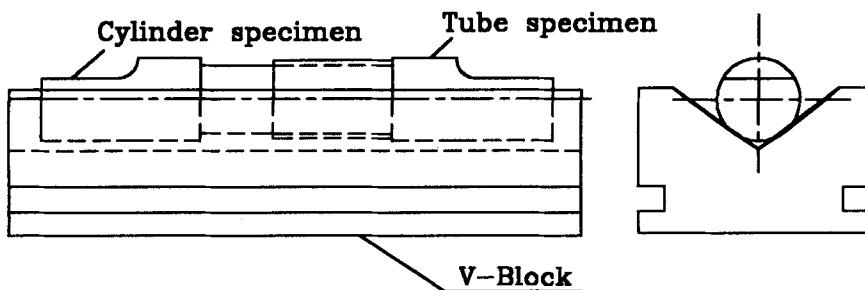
V-Block used for concentric bonding of the tubular adhesive joint.
